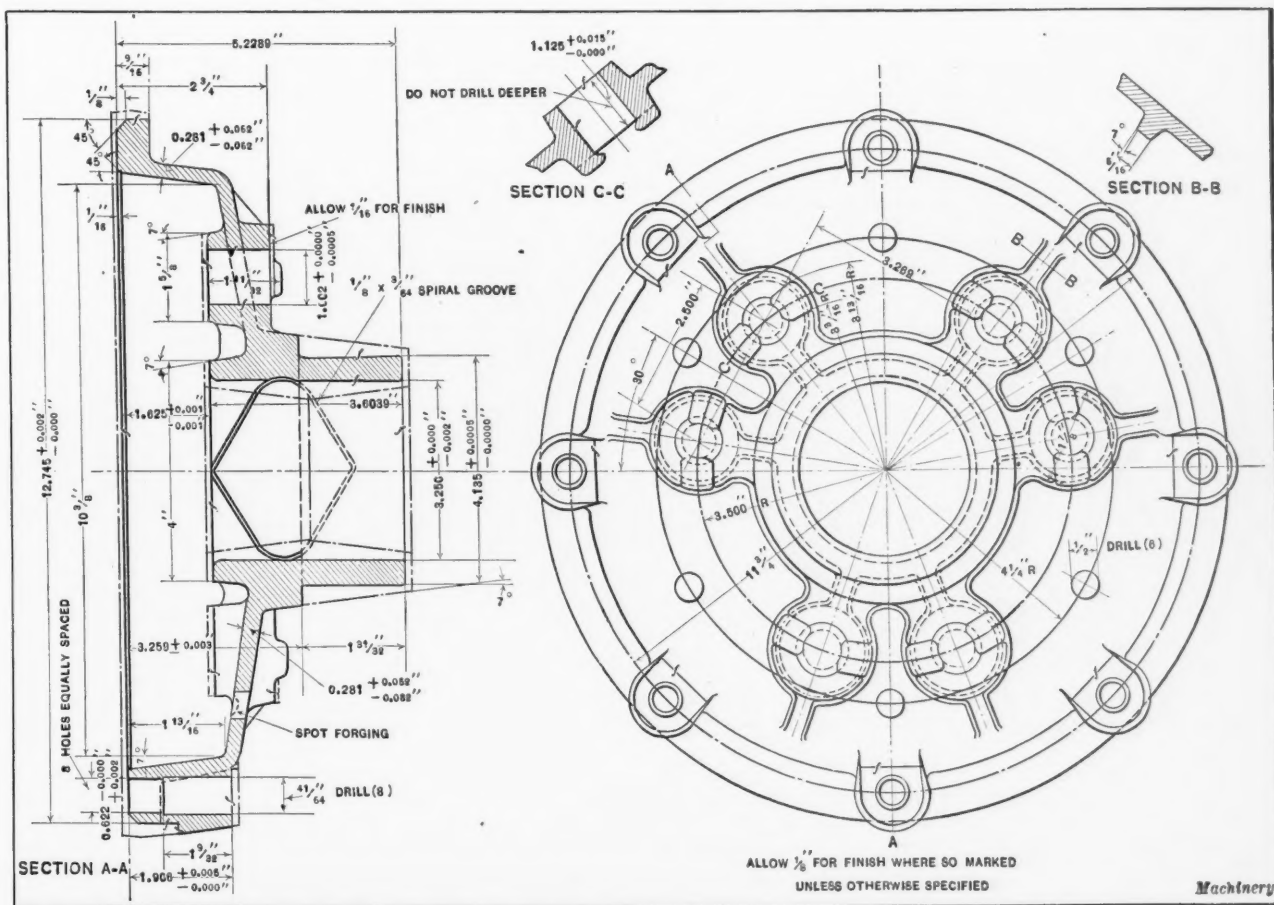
Differential Gear-case for Motor Truck, which is produced by drop-forging
